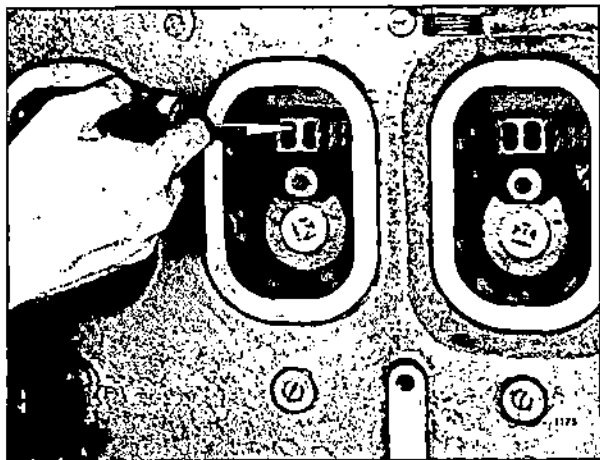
Inspecting for Broken Piston Rings Through Cylinder Liner Air Ports
